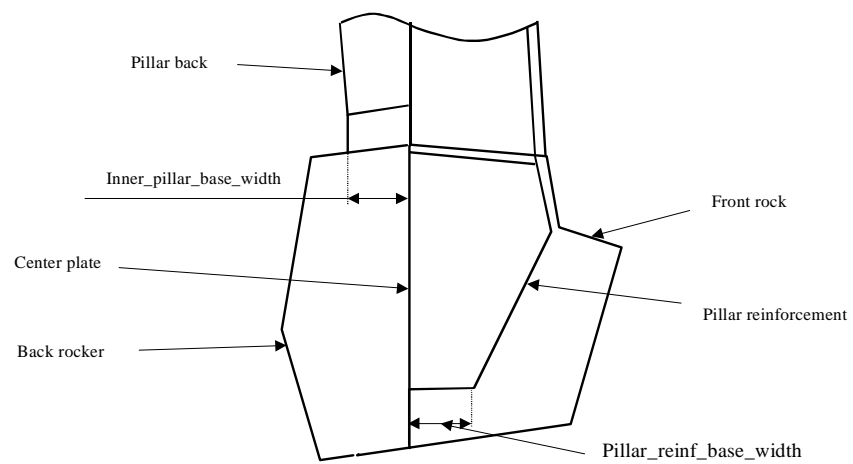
Pillar Reinforcement and Rocker Cross Section
